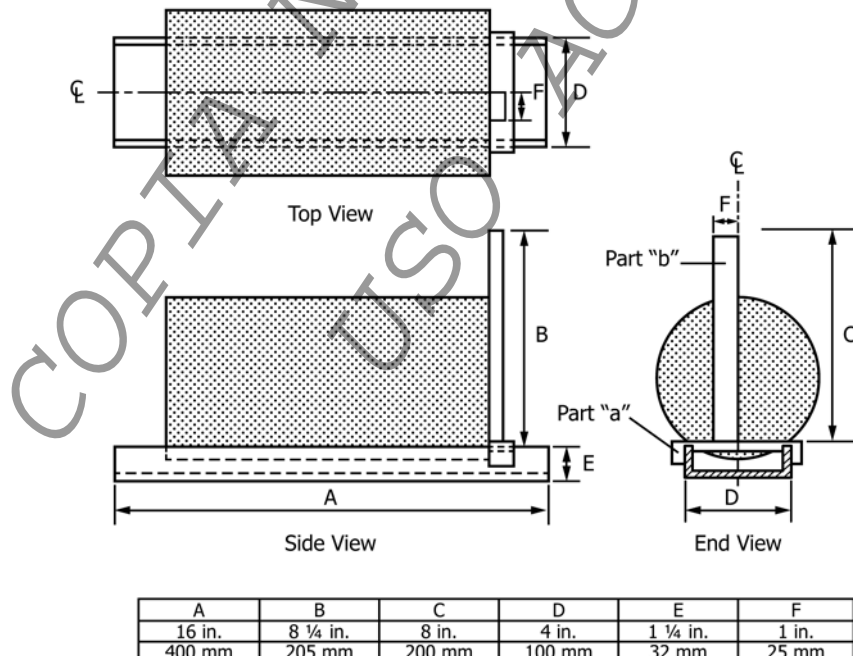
General Views of a Suitable Apparatus for Marking End Diameters Used for Alignment of Specimen in Testing Machine
